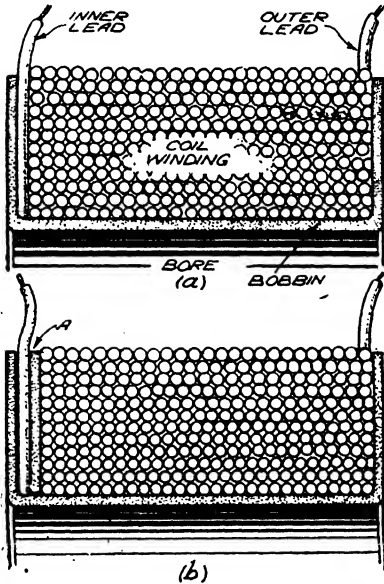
HALF-SECTION OF BOBBIN-WOUND COIL.
